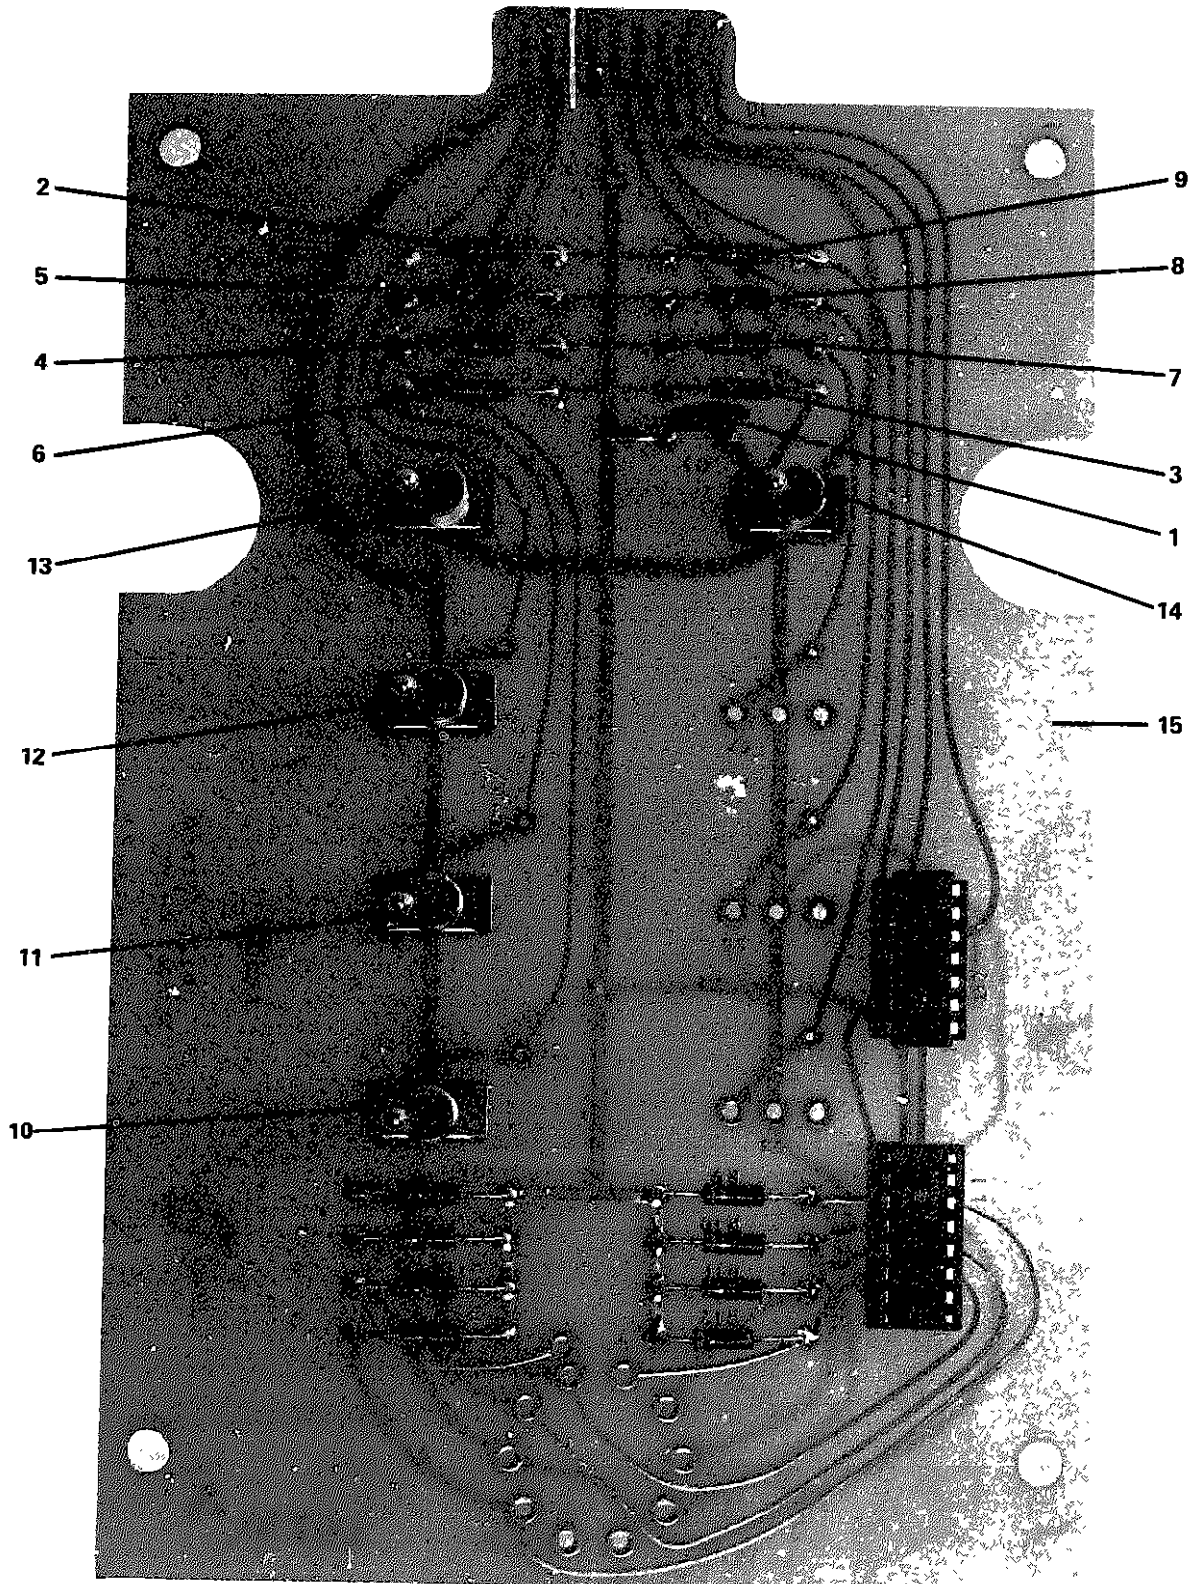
Rad Test Panel Circuit Card Assembly 1A8A1
